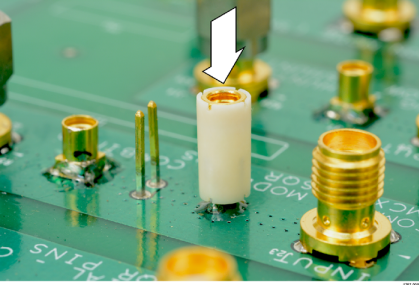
Pushing the MMCX-to-0.062-inch (1.57 mm) adapter in place
